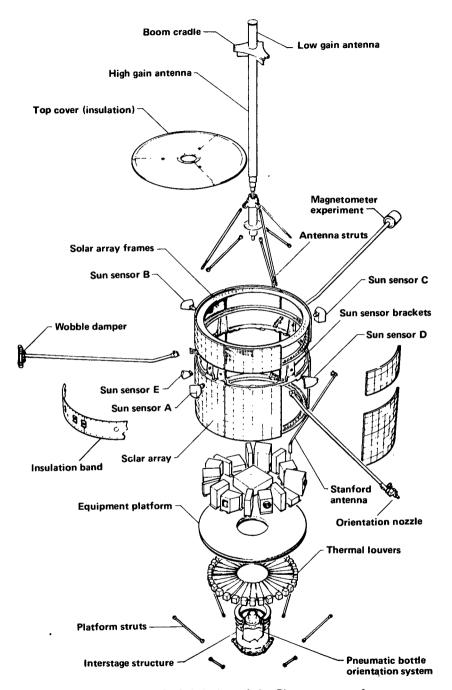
Exploded view of the Pioneer spacecraft.
